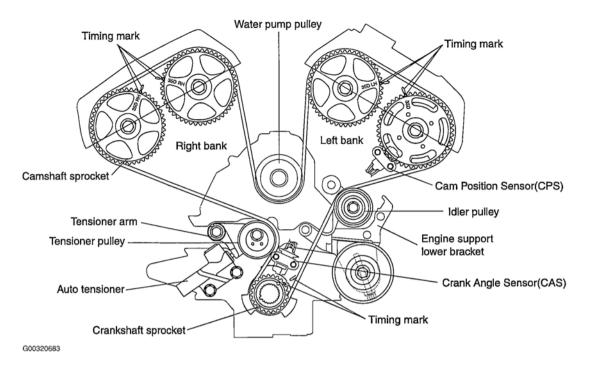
Identifying Timing Belt Positions Courtesy of KIA MOTORS AMERICA, INC.
